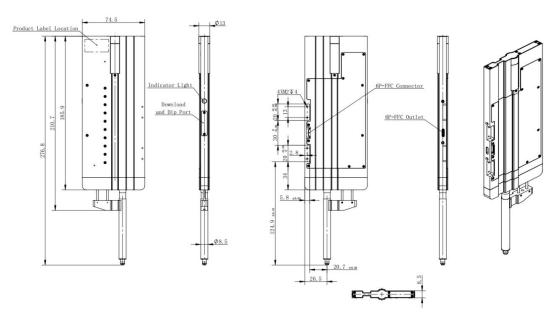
model B of SP13 Dimensional Drawings & Mounting Specifications
